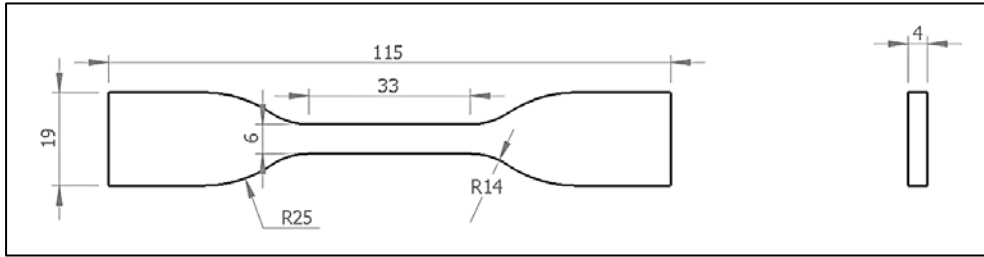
SOLIDWORKS DRAWING OF ASTM D638 TYPE IV SPECIMEN
